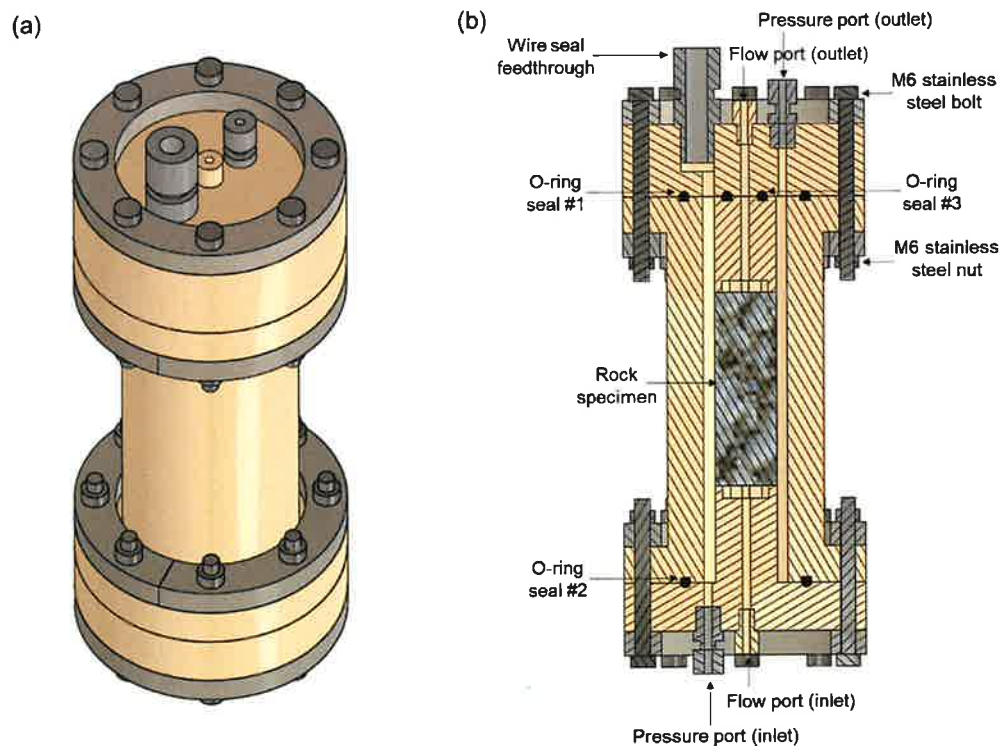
Core holder assembly: (a) Three-dimensional view; (b) Cross-sectional view.
